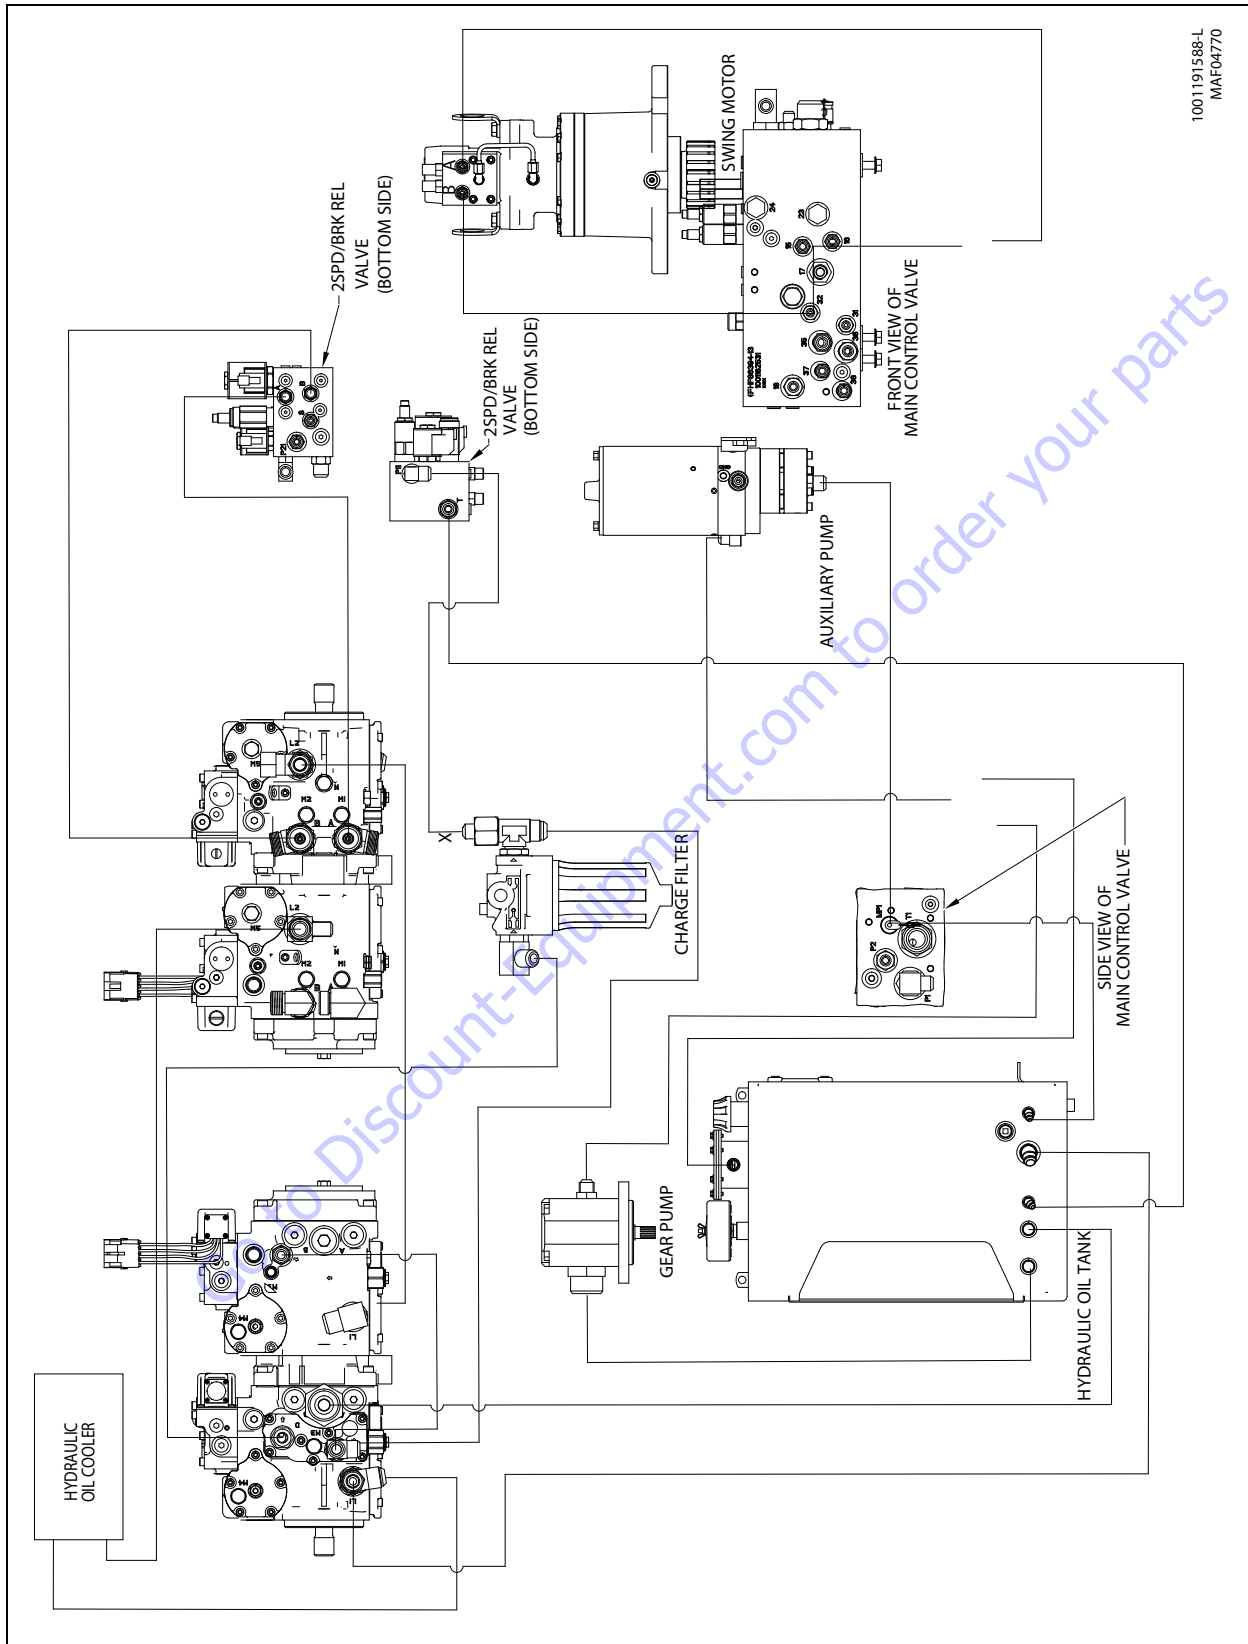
Hydraulic System Installation (400SC) - Sheet 3 of 16
